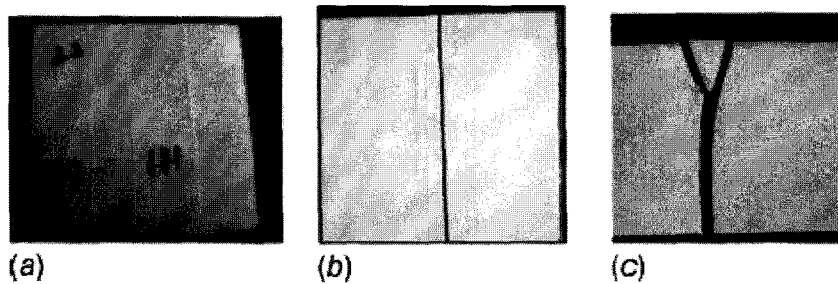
(a) photographs of scribing, (b) controlled fracture, and (c) uncontrolled fracture [1].
